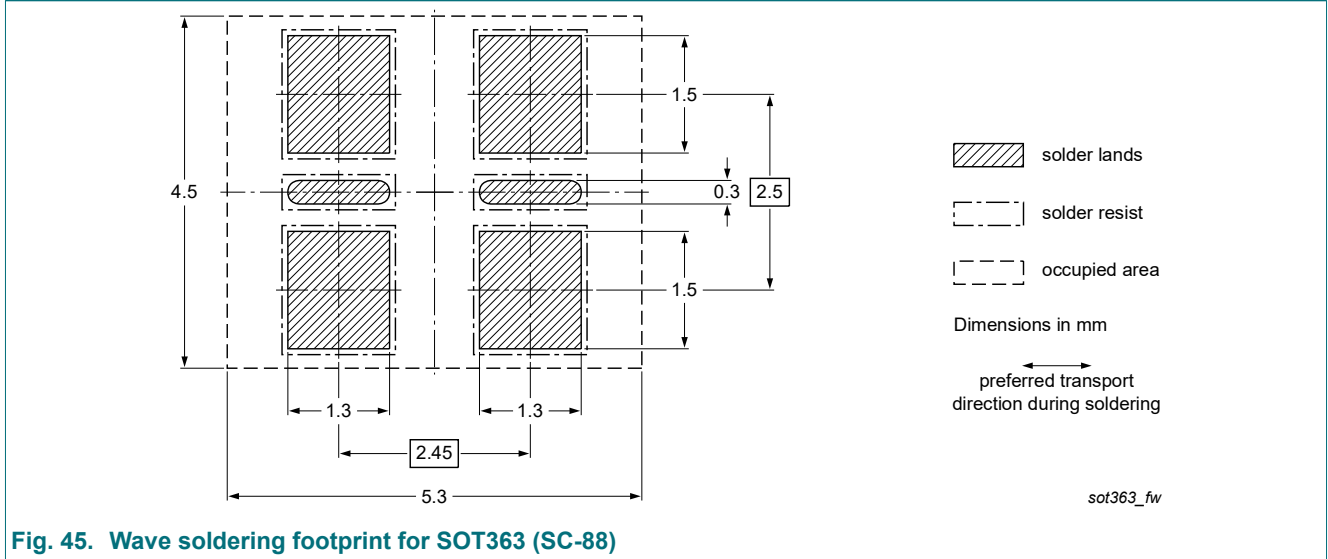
Wave soldering footprint for SOT363 (SC-88)
